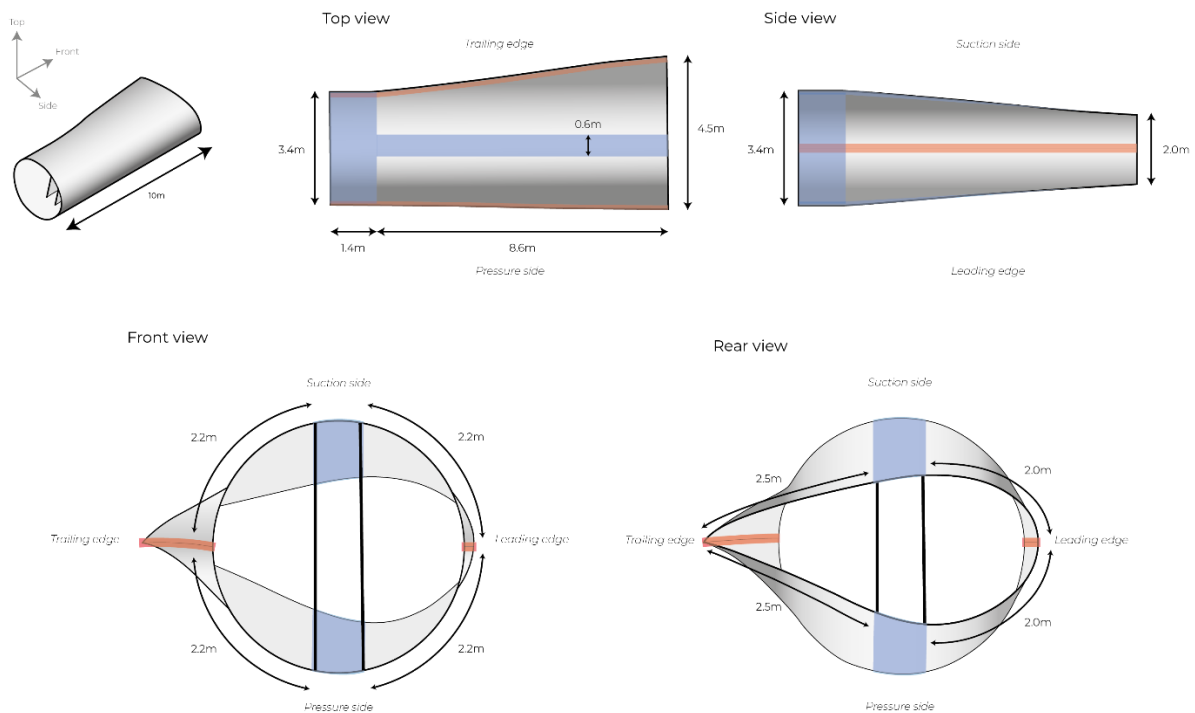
Dimensions of the elements retrieved out of inboard.
